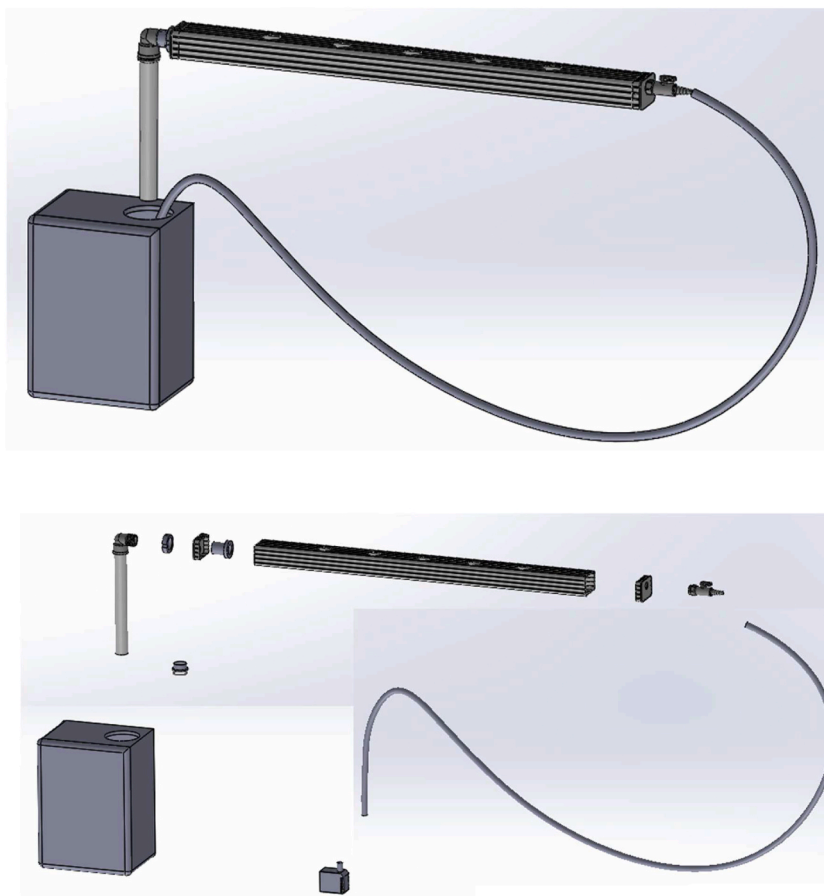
NFT culture unit components, top: assembled and bottom: exploded design.
